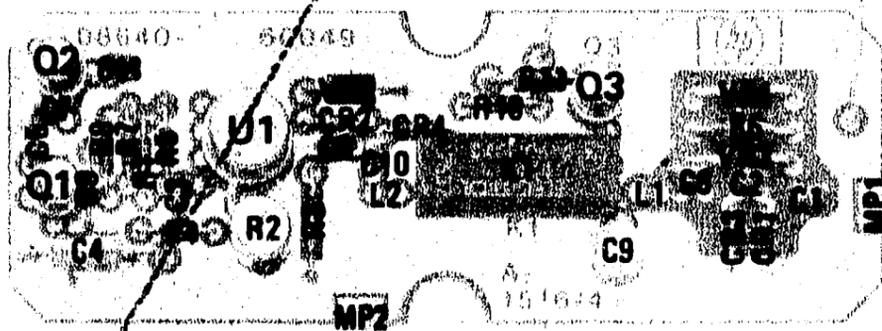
A6A1 Reverse Power Protection Board Assembly Component Locations
